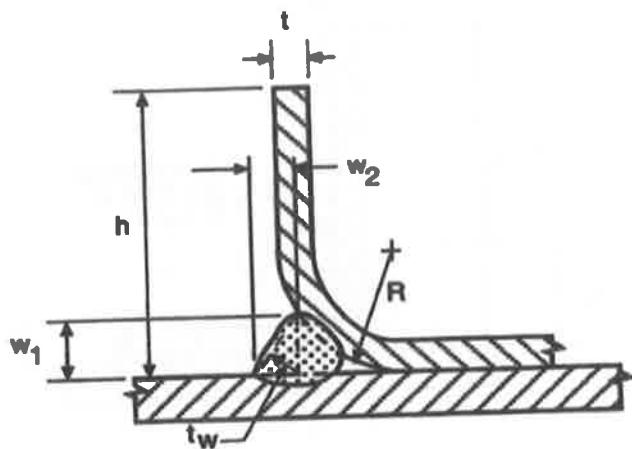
Flare Bevel Groove Weld (Not filled flush to surface, $w_1 < R$)
